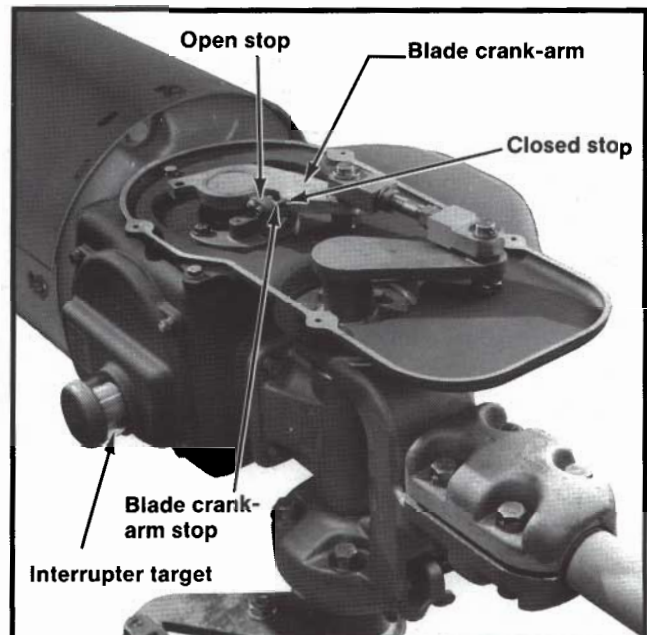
Brain-linkage detail. Linkage cover removed *only* for photographic clarity.
